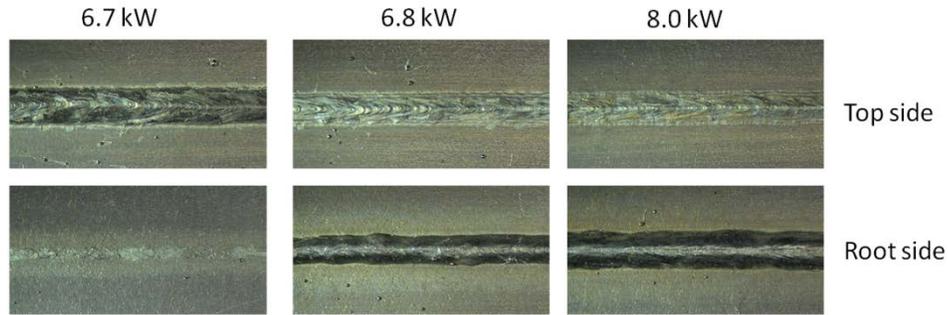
Weld seam qualities of Batch 3, Supplier 2
